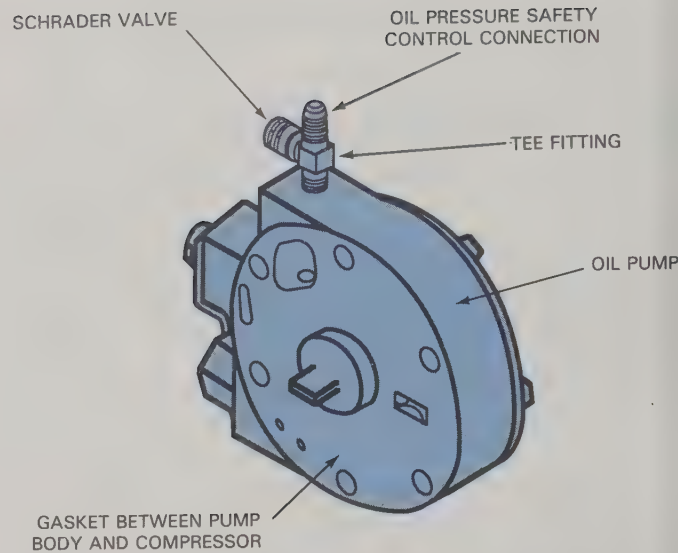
A Schrader valve threaded into a tee fitting permits use of a gauge manifold for reading oil pressure at the pump.
